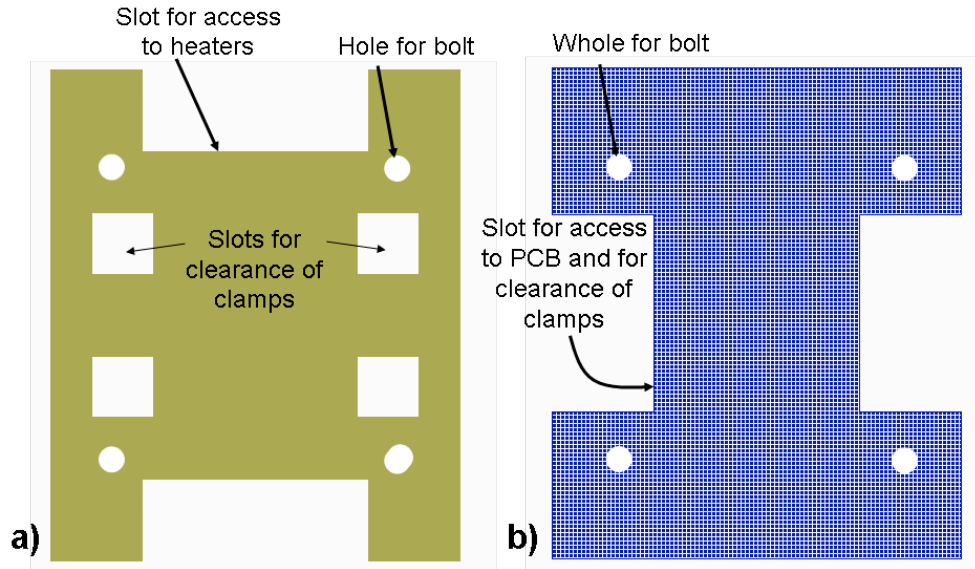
The layout of the a) copper heat sink and b) Cogetherm™ insulator plate.
